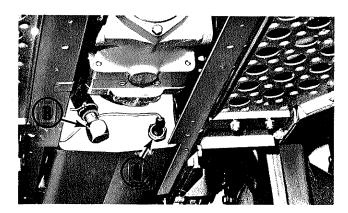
Front of transmission as seen from beneath the tractor with dust shield removed.
